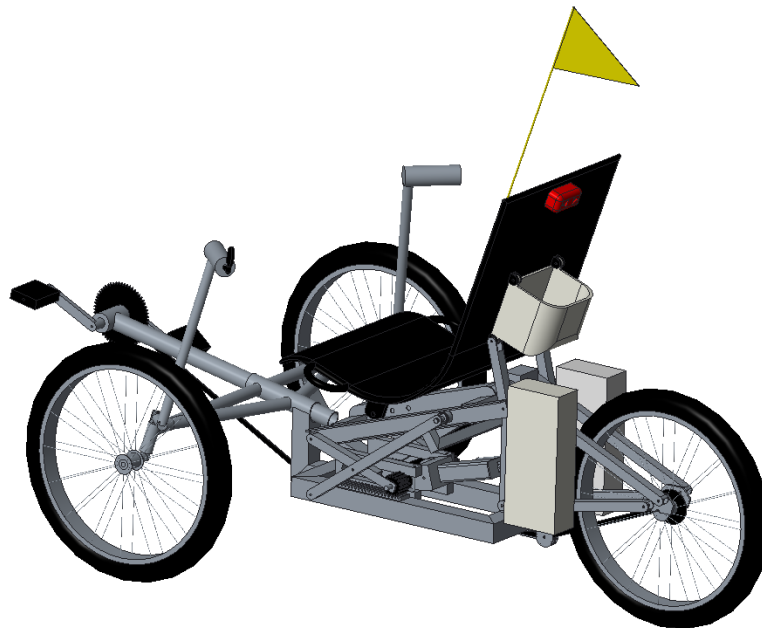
A Back Isometric View of the Redesigned CAD Model.
